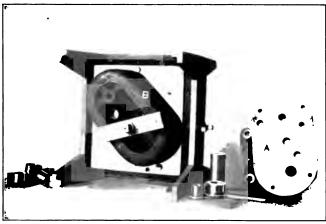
Rear View of Drill Jig shown in Fig. 75, with Cover to be Drilled in Place
